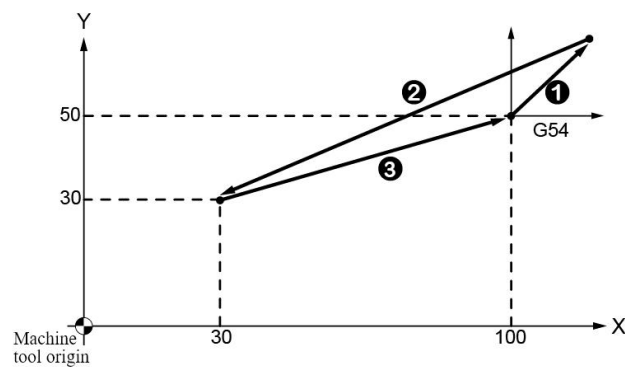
3 Program Legend of Machine Tool Coordinate System and Workpiece Coordinate
